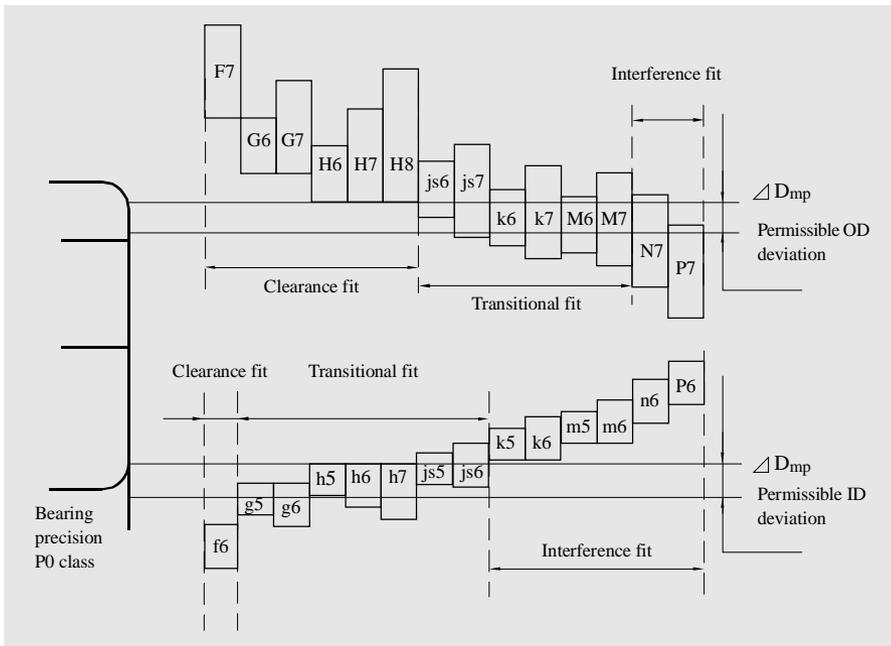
Relations between dimension tolerances of shaft and housing bore and fit ( bearings of PO class precision).
